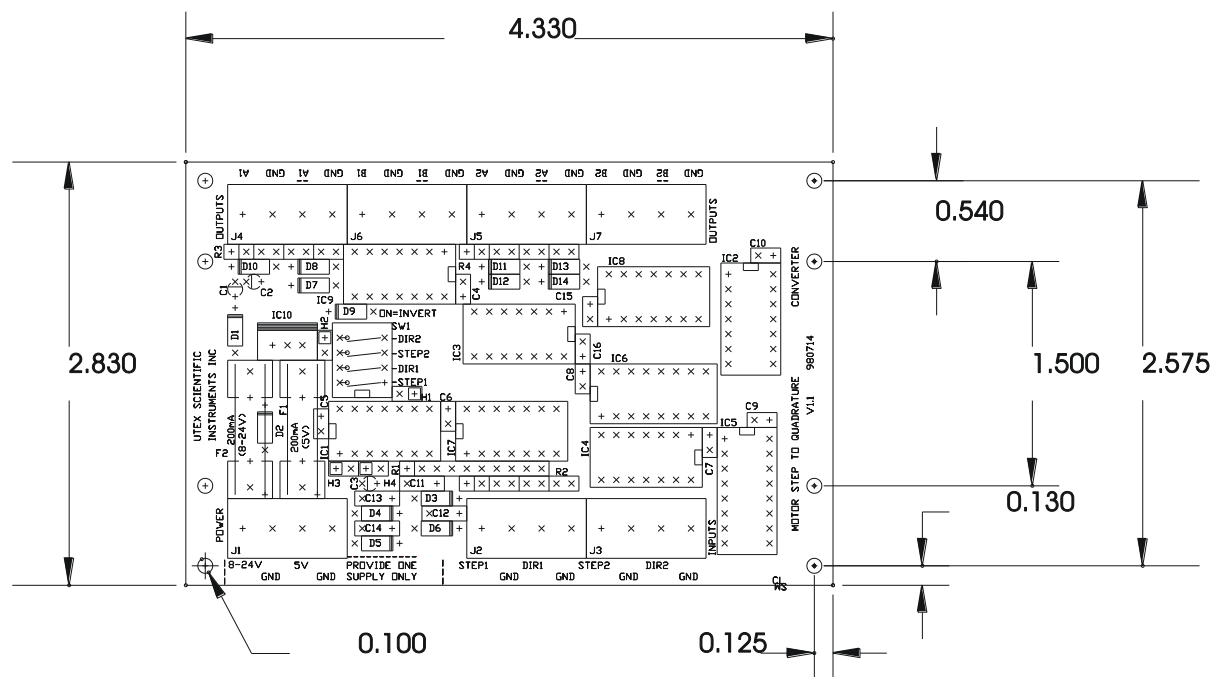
QC100 dimensions (/001 or /003 screw/standoff mounting option)
